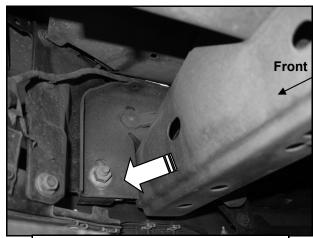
Remove and unplug adaptive cruise control from driver/left side of frame, if equipped
